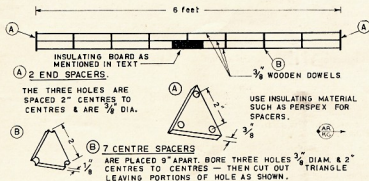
CONSTRUCTION OF ELEMENT FORMERS
